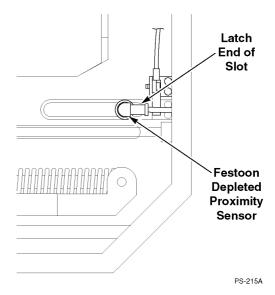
Festoon Depleted Proximity Sensor Adjustment
